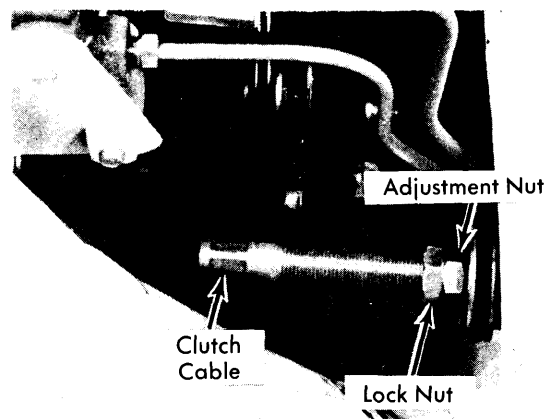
Clutch Free Play Adjustment Location – Adjustment Nut Moves Along Threaded Rod
